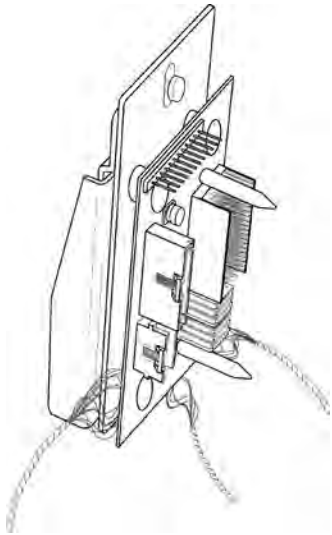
Gas Engine Connector on Driver Transition PCB
